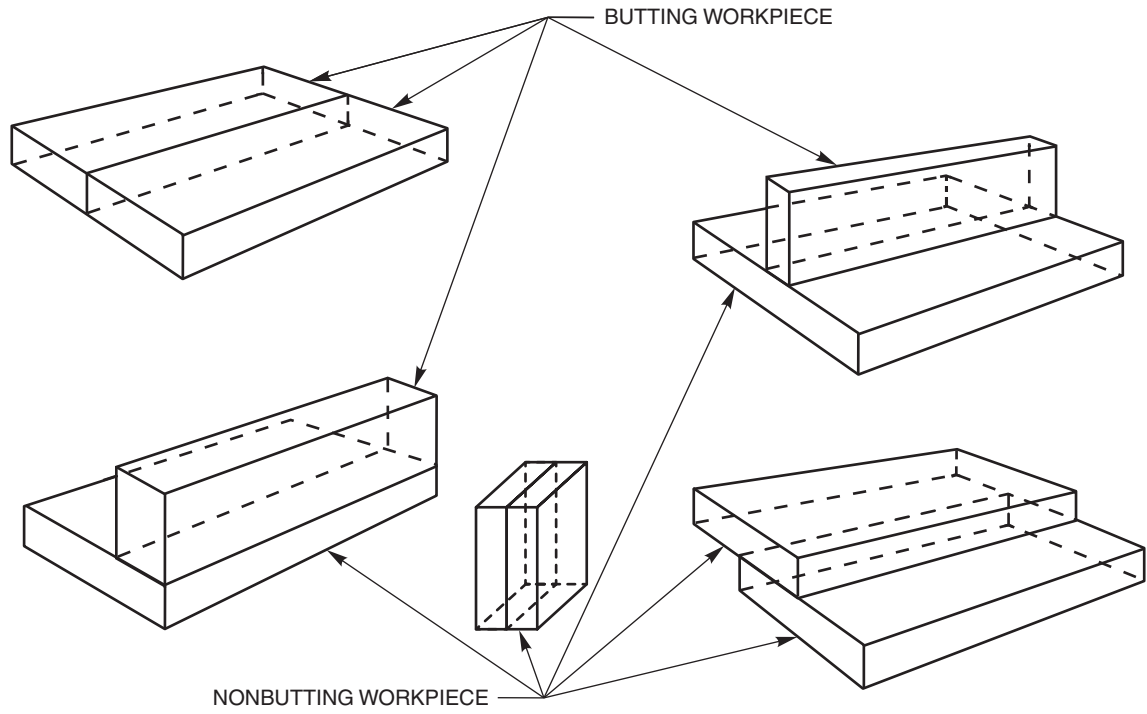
Butting and Nonbutting Workpiece or Workpieces
